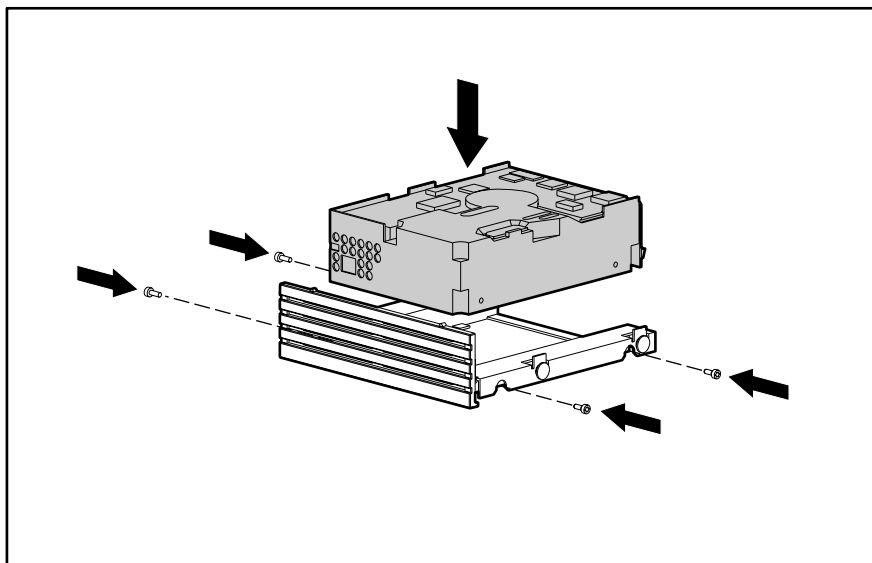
Attaching a non-hot-plug hard drive to the removable media tray
